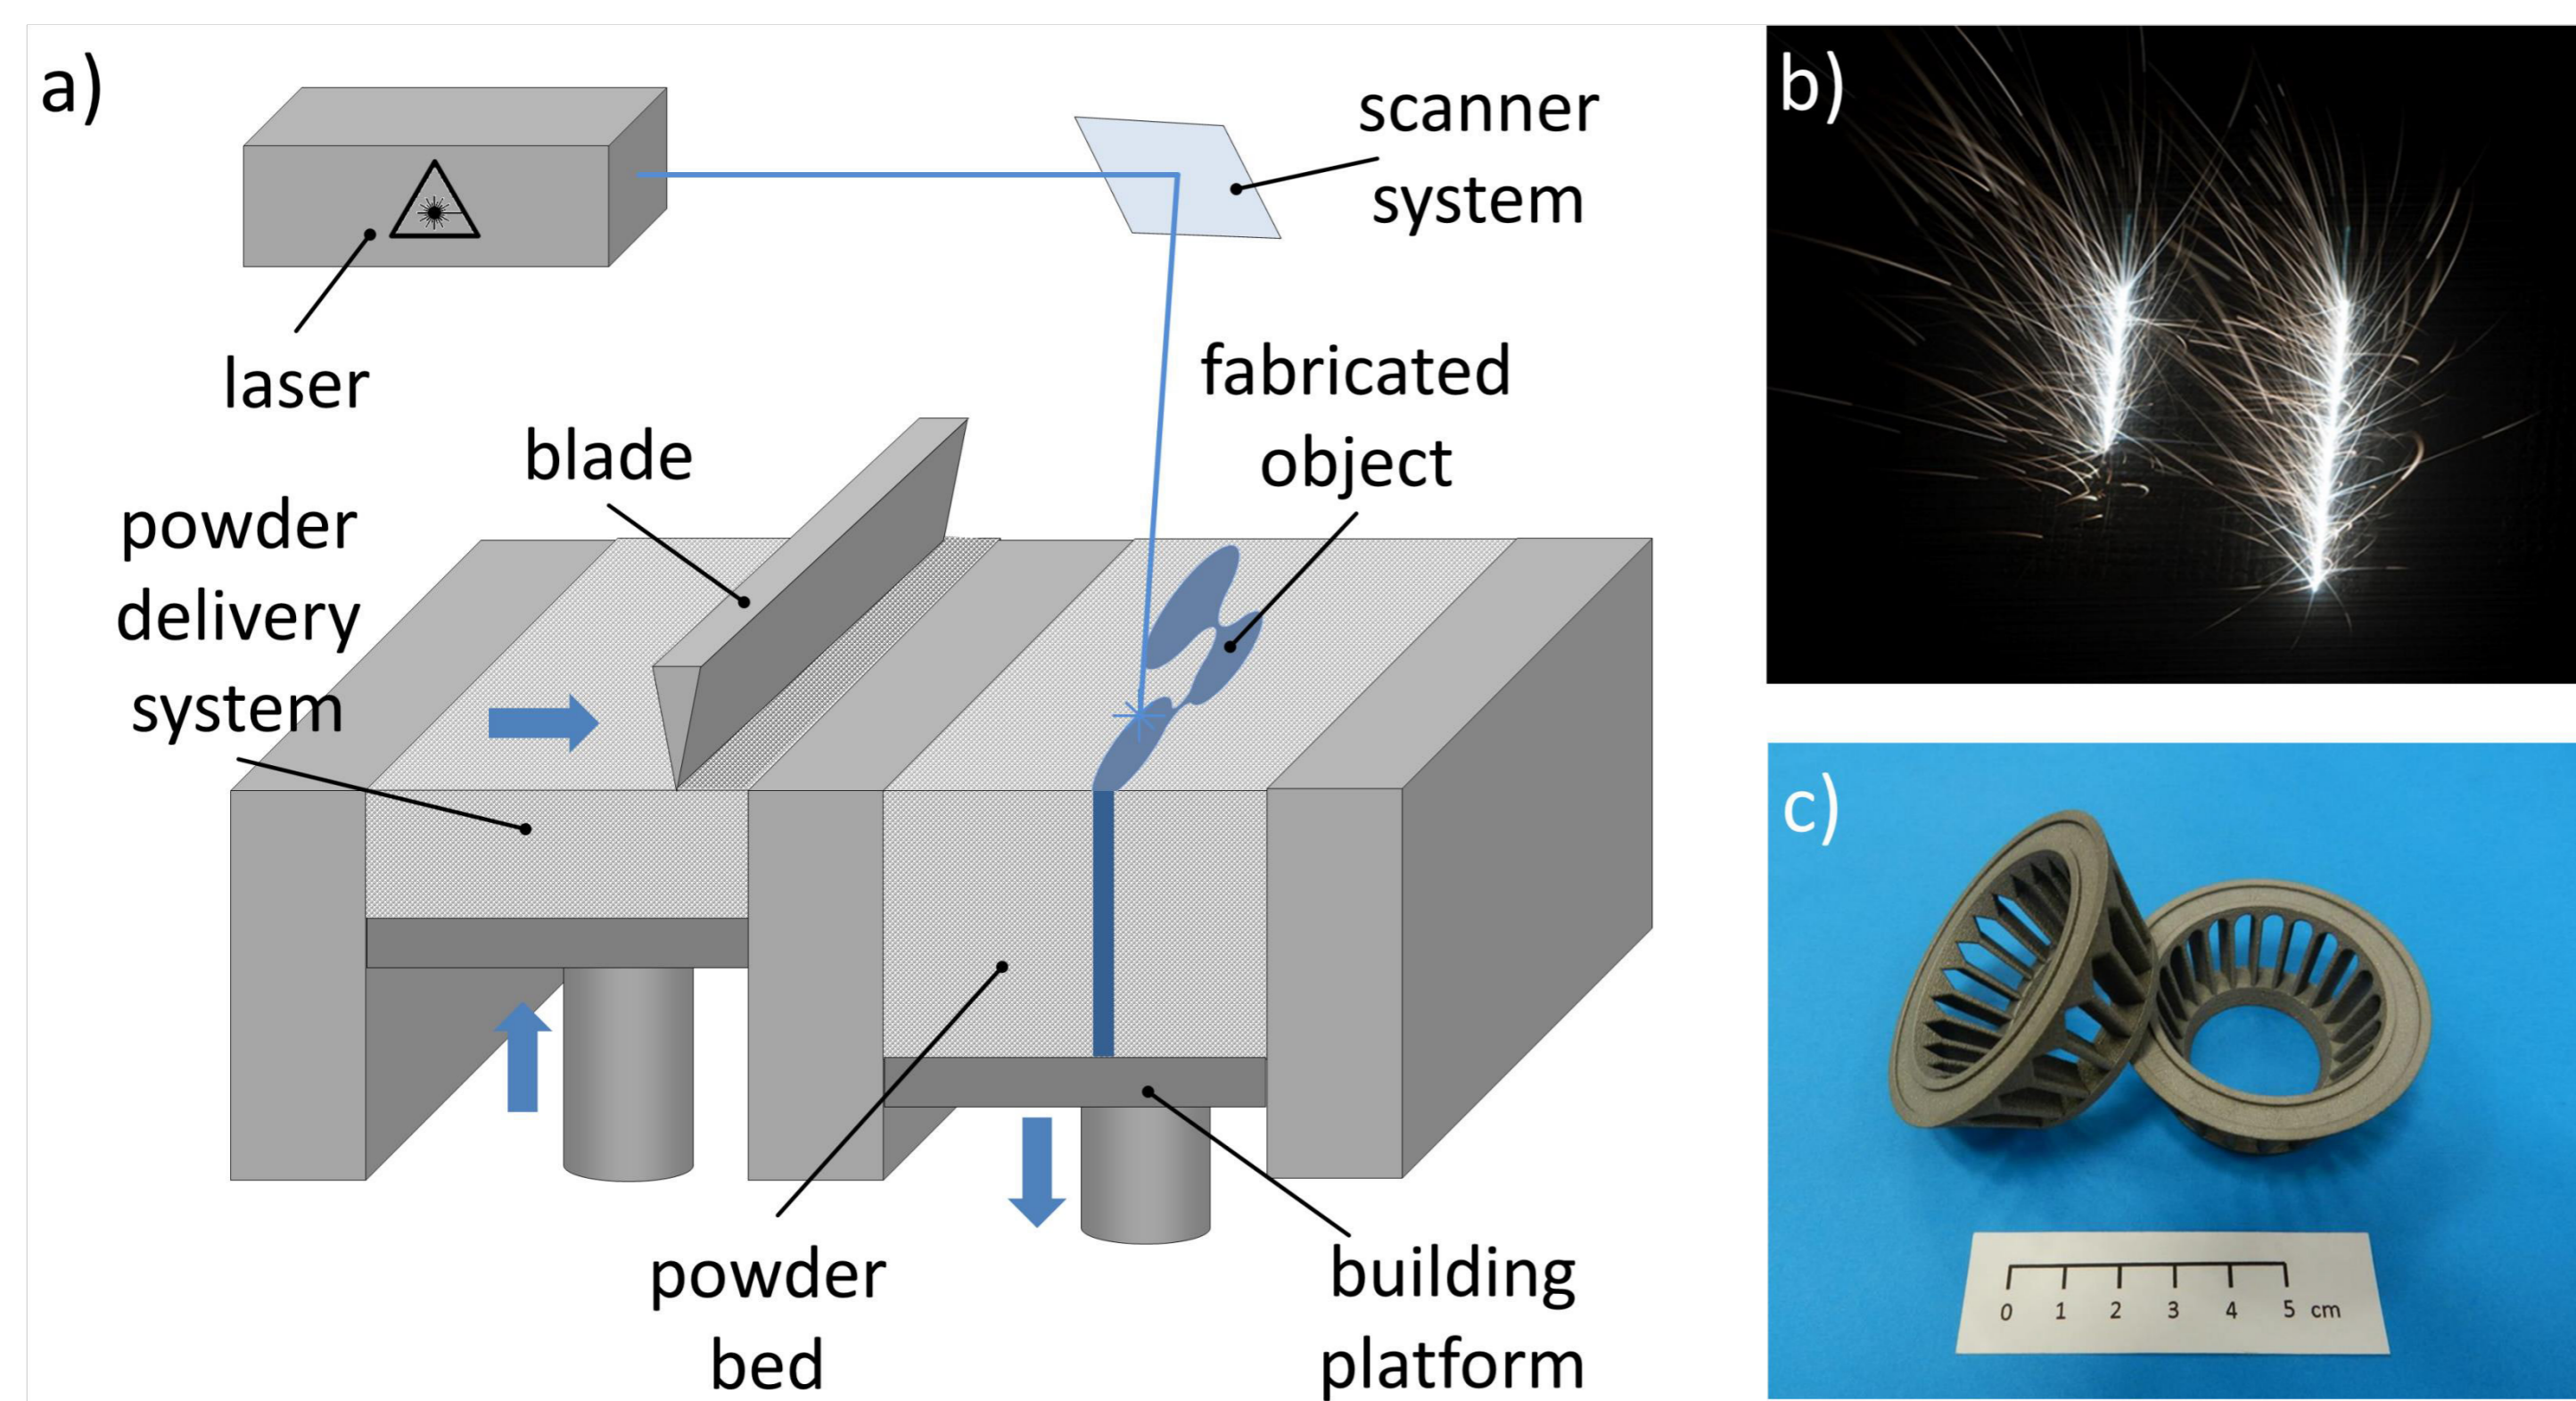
Selective Laser Melting: a) technology principle; b) process during operation; c) molybdenum demonstrator parts.
